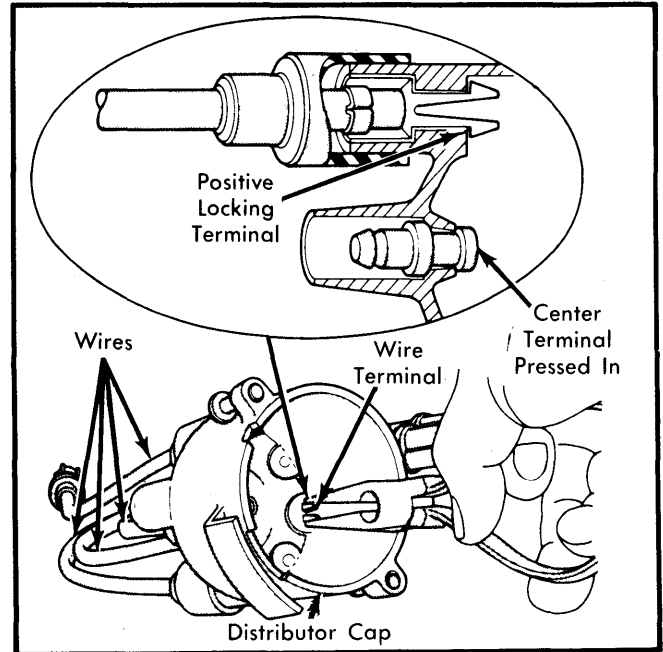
Use Pliers to Release Positive-Locking Spark Plug Wire Terminals
